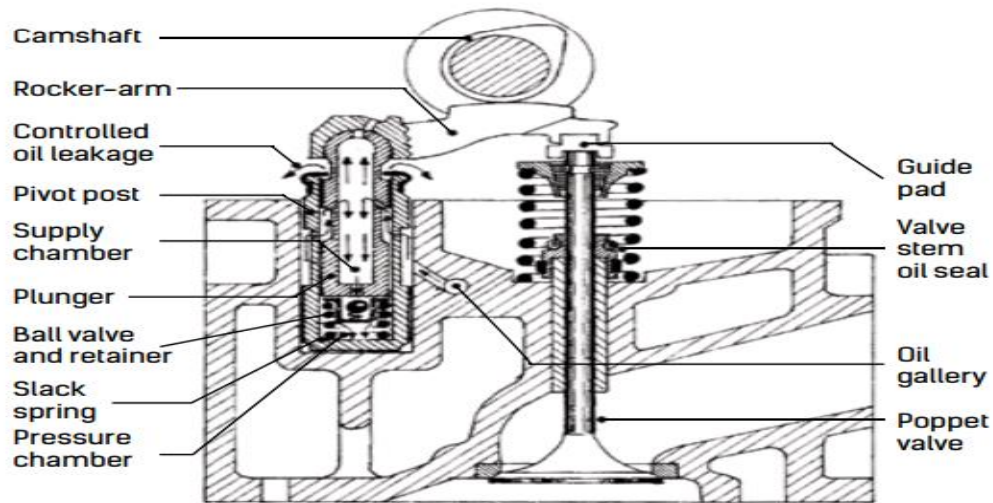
engine valve assembly (Venter & Sabunet, 2017)
